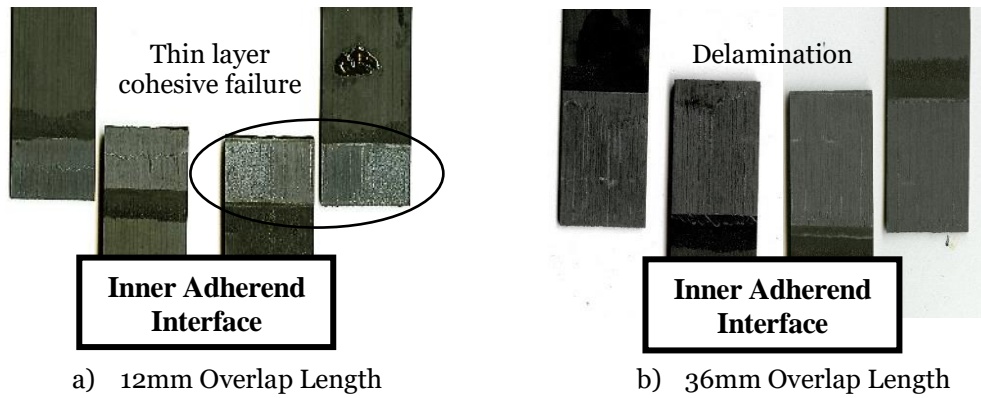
Fracture surfaces for 4mm inner adherend cases at HTW
